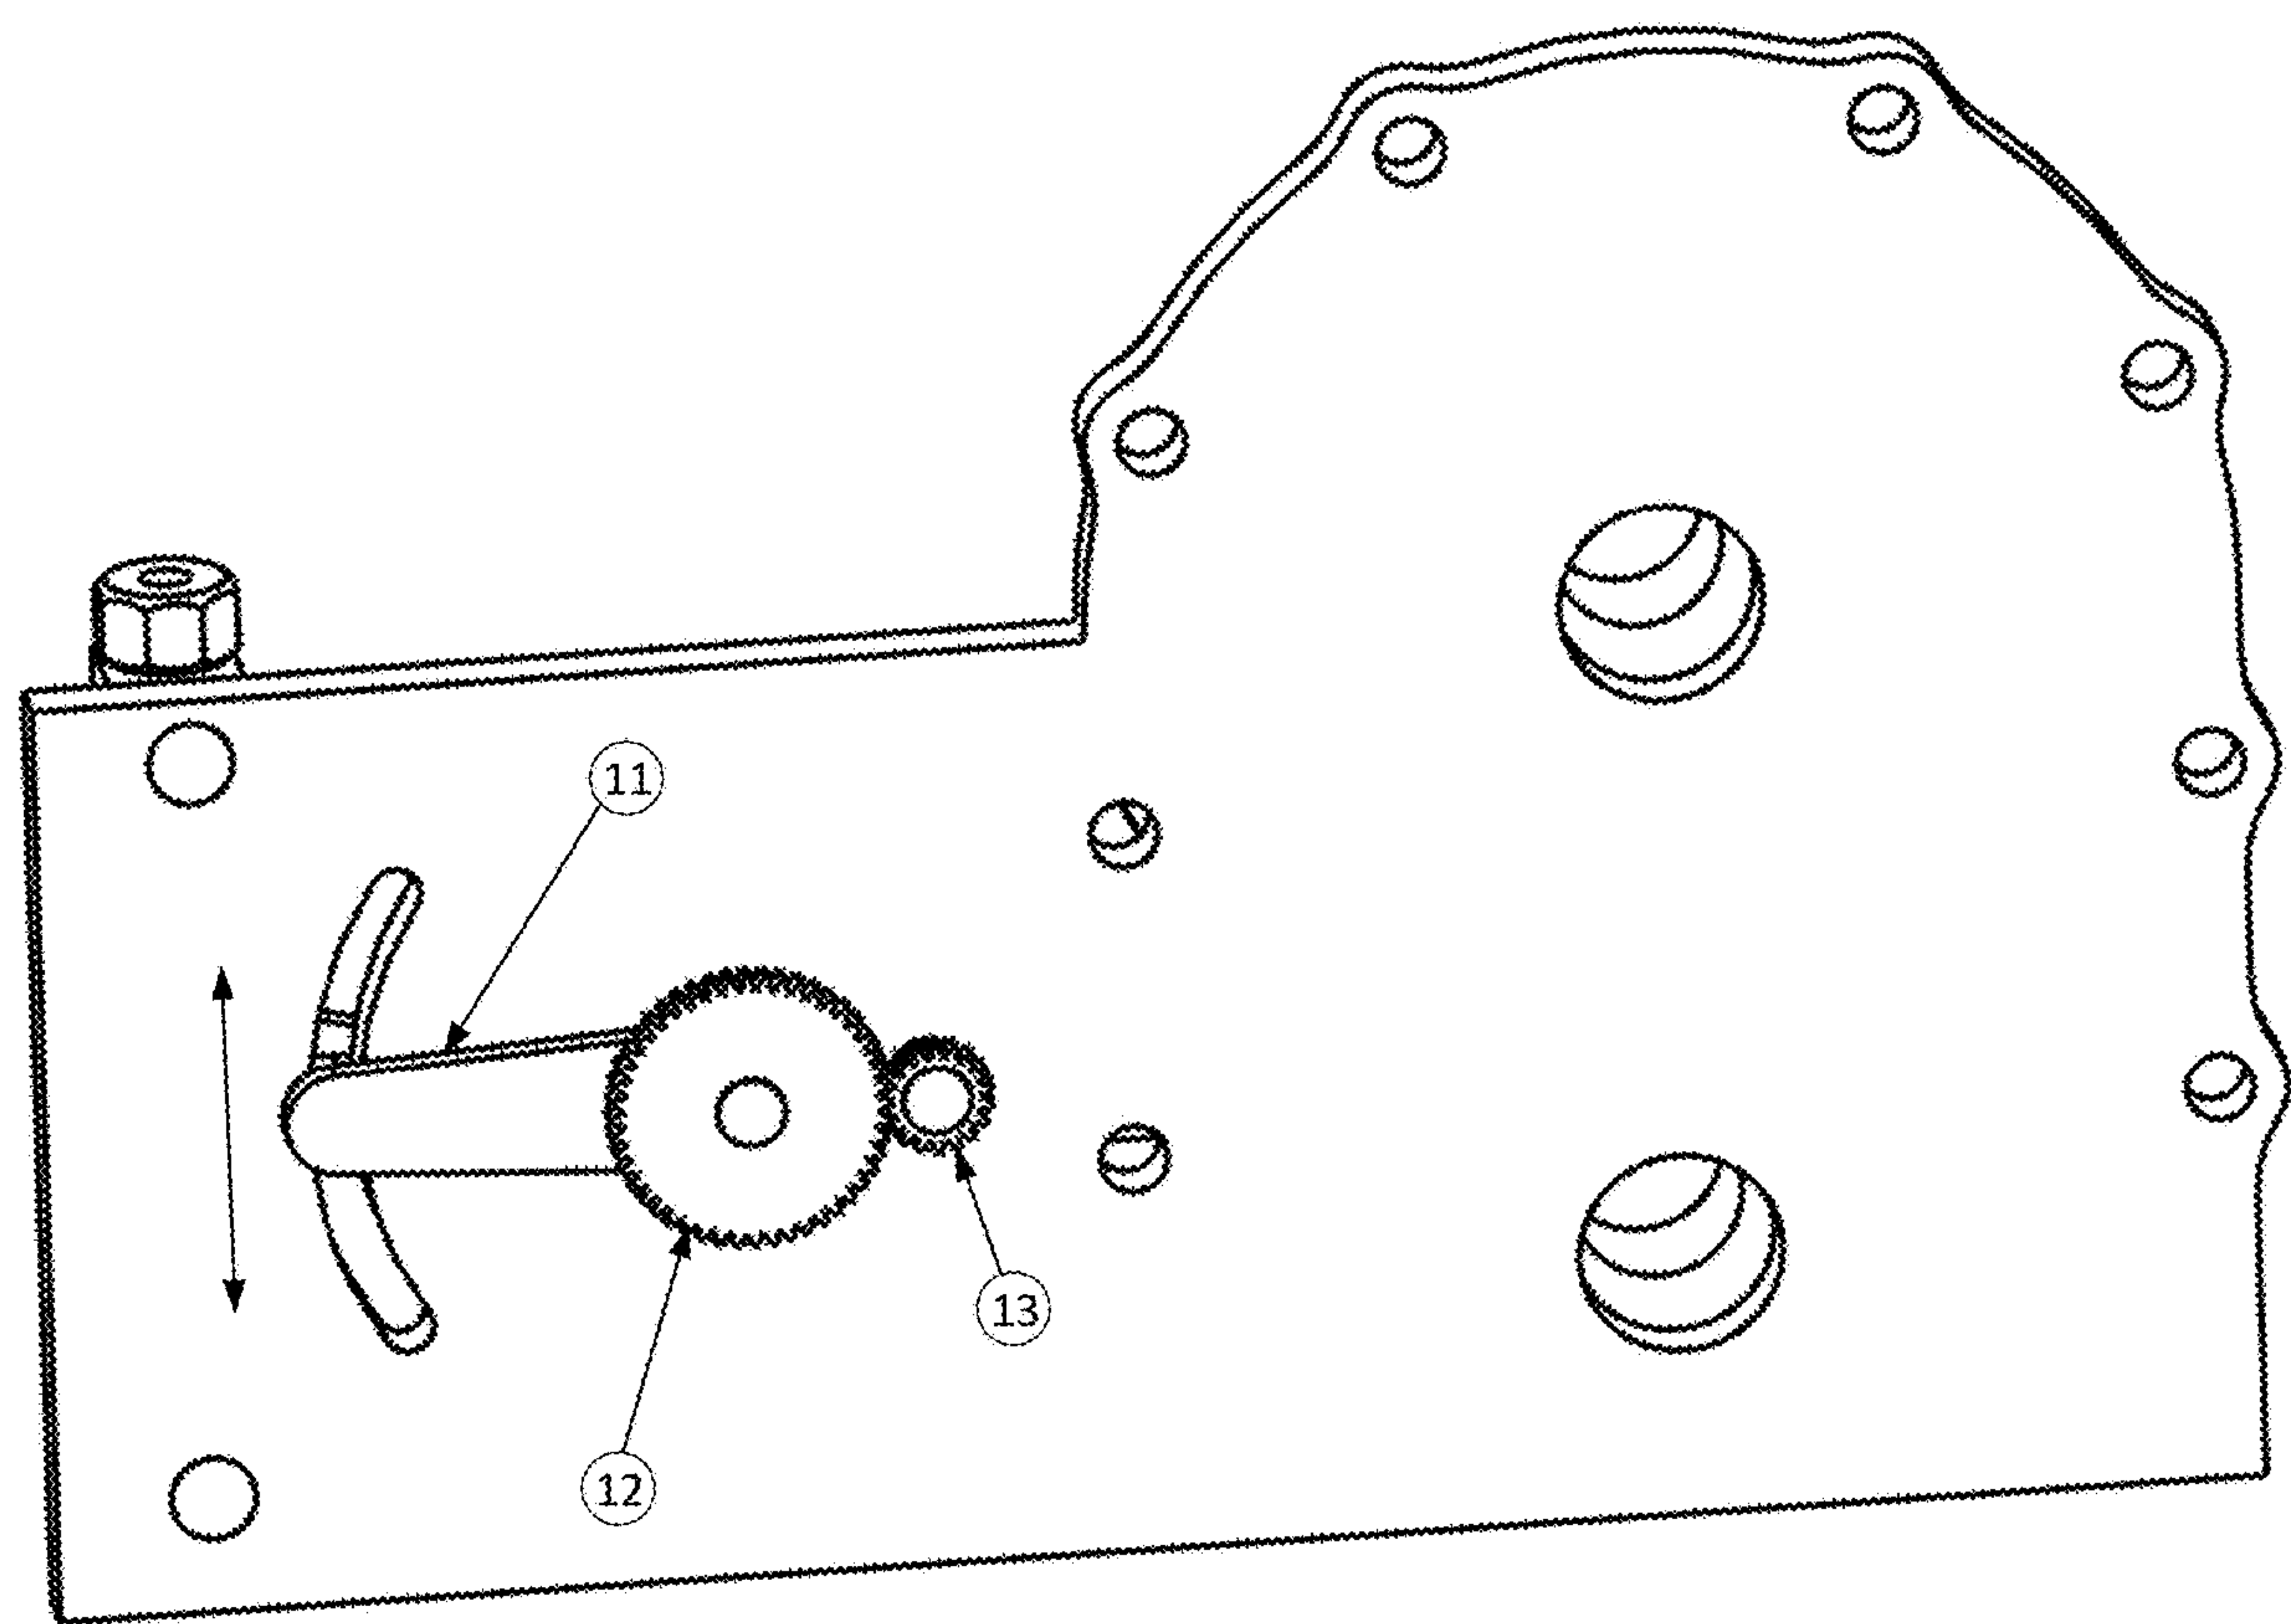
Rear View Showing Cam Actuator Lever and Gears
